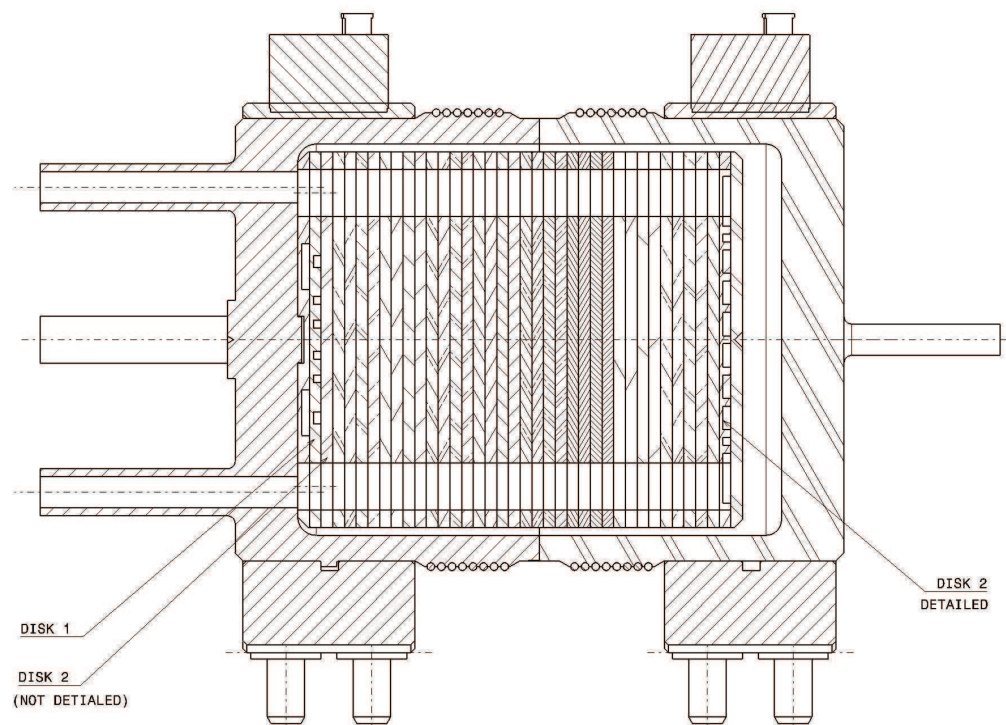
Section view of Heat eXchanger in plane of symmetry (drawing).
